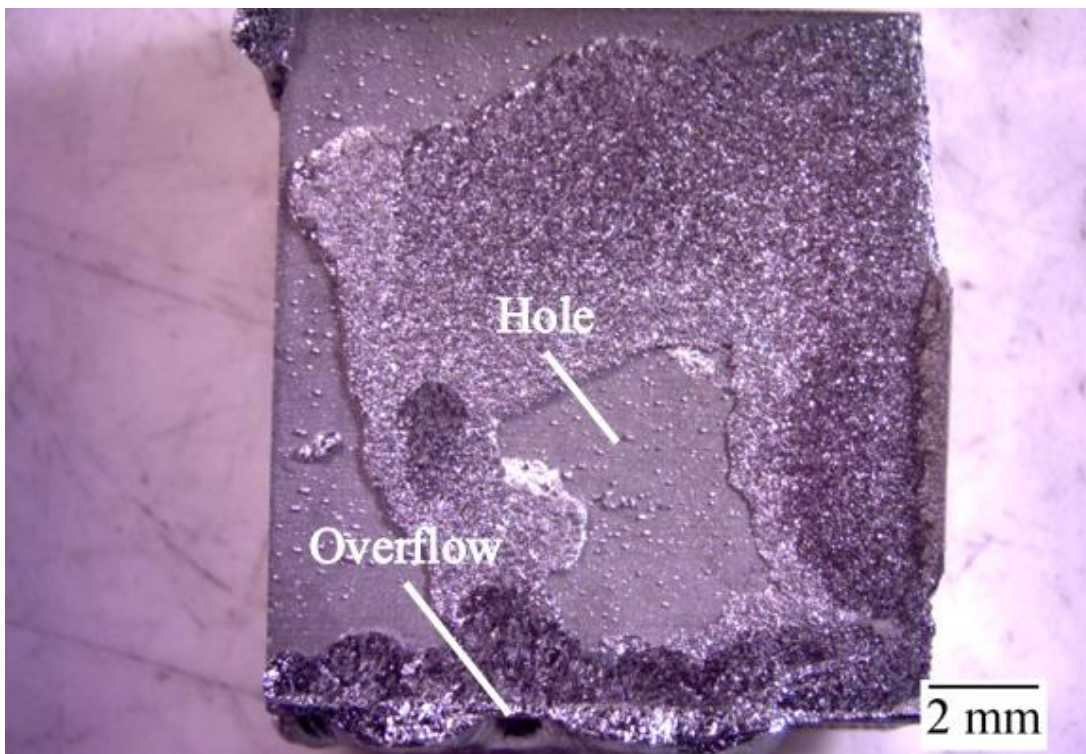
Fracture surface with filler metal coverage gap in the middle of the foil preform
